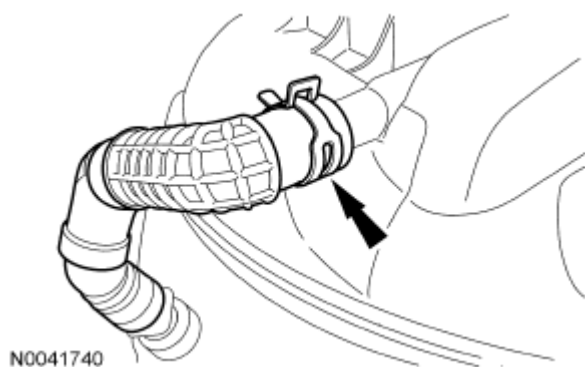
Locating Crankcase Vent Hose From Upper Intake Manifold
